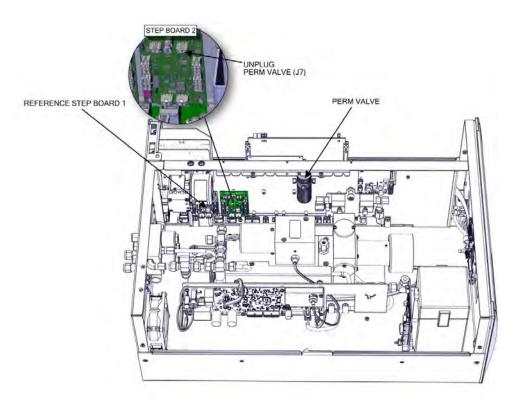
Removing and Replacing the Solenoid Valve pt 1
